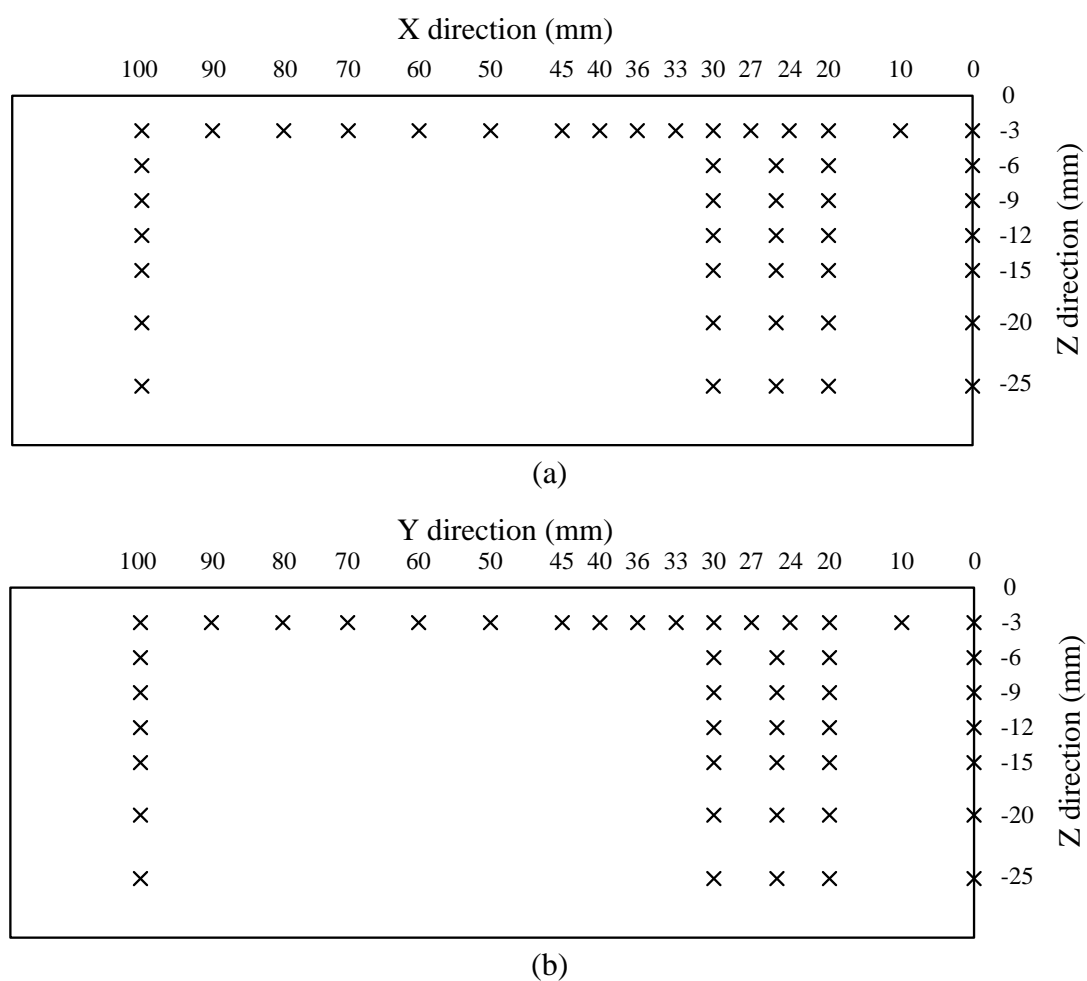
Residual stress measurement points of pad weld samples (a) on the XZ plane and (b) on the YZ plane. Z-direction was taken as the thickness and 0,0,0 point is on the top side of the pad weld plate.
